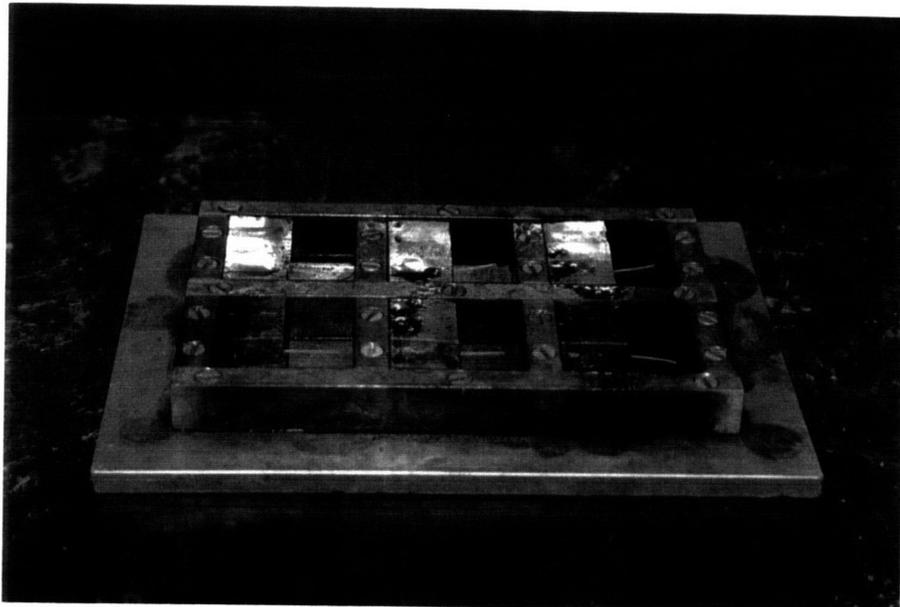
Mold with Plexiglas blocks inserted - ready for specimen casting.
